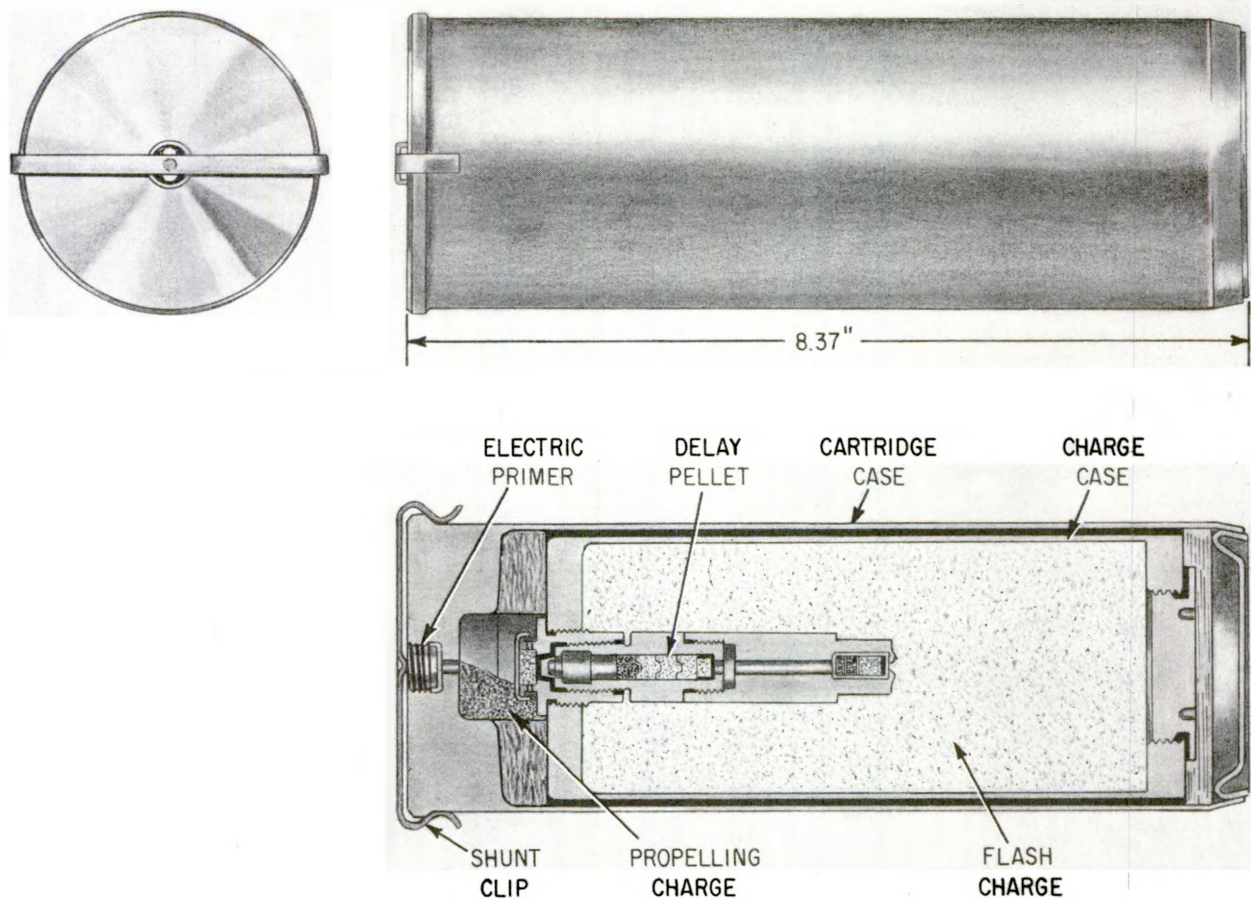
Photoflash Cartridge M123, external view and cross section.
